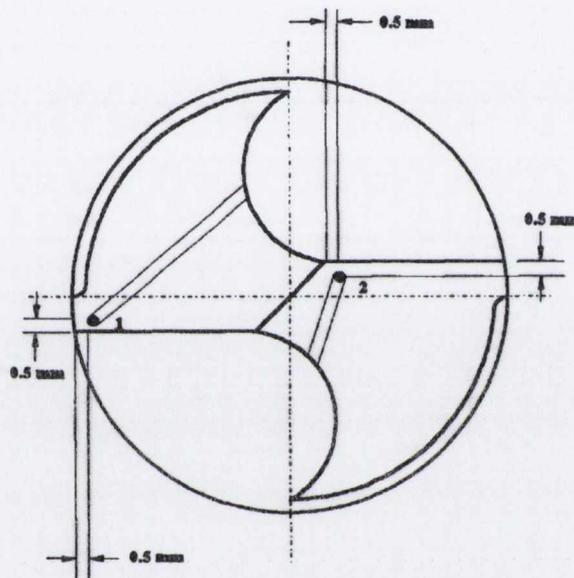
Thermocouple locations on the flank surface of a drill used by Chen.
